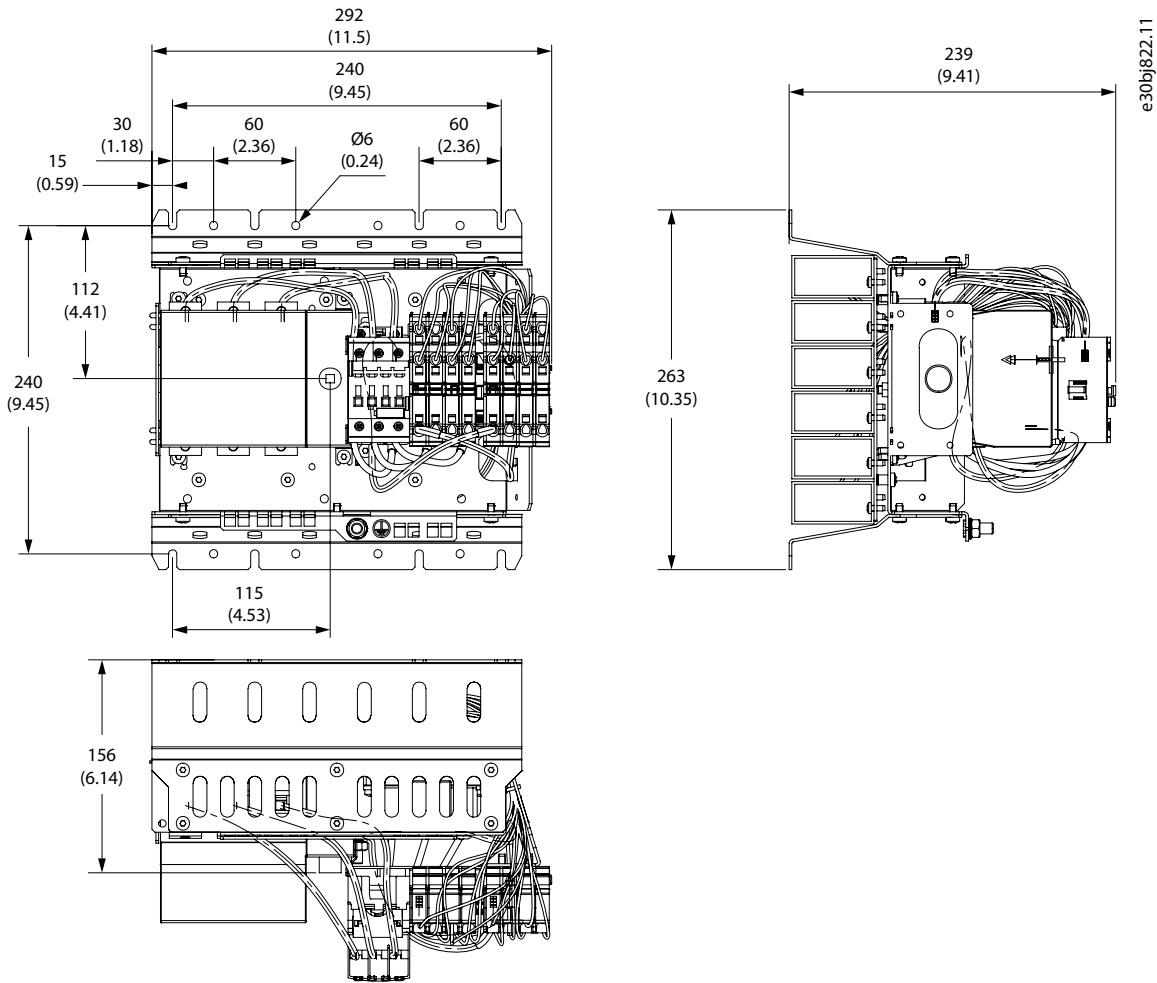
Dimensions of the Pre-charging Unit in mm (in), UL
